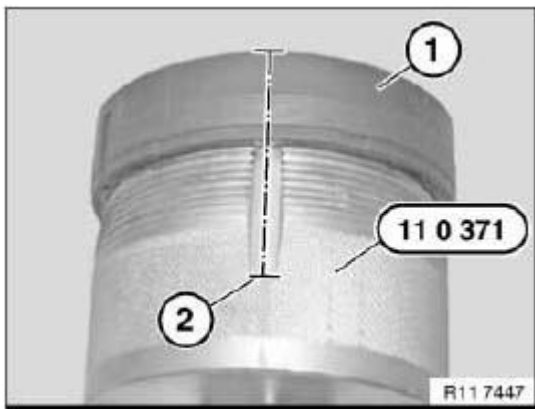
Identifying Crankshaft Radial Seal And Cutting Line
